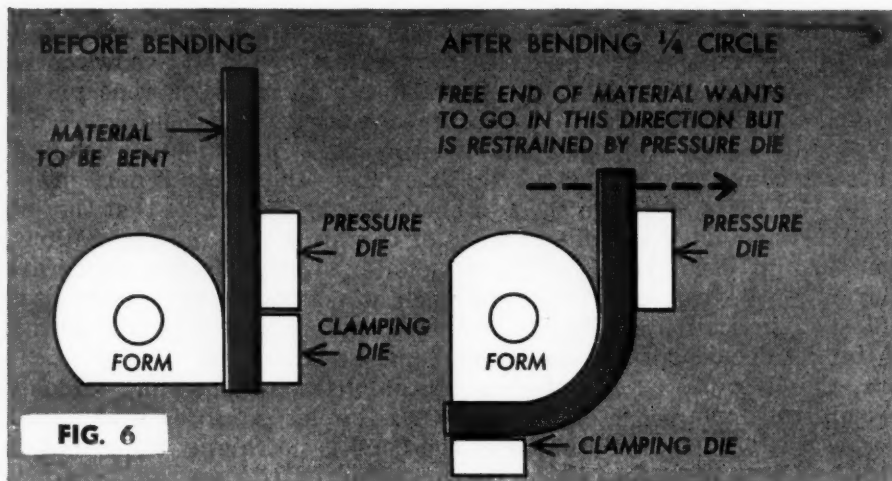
Diagrammatic View Showing how Bending is Performed on a Rotary Machine
